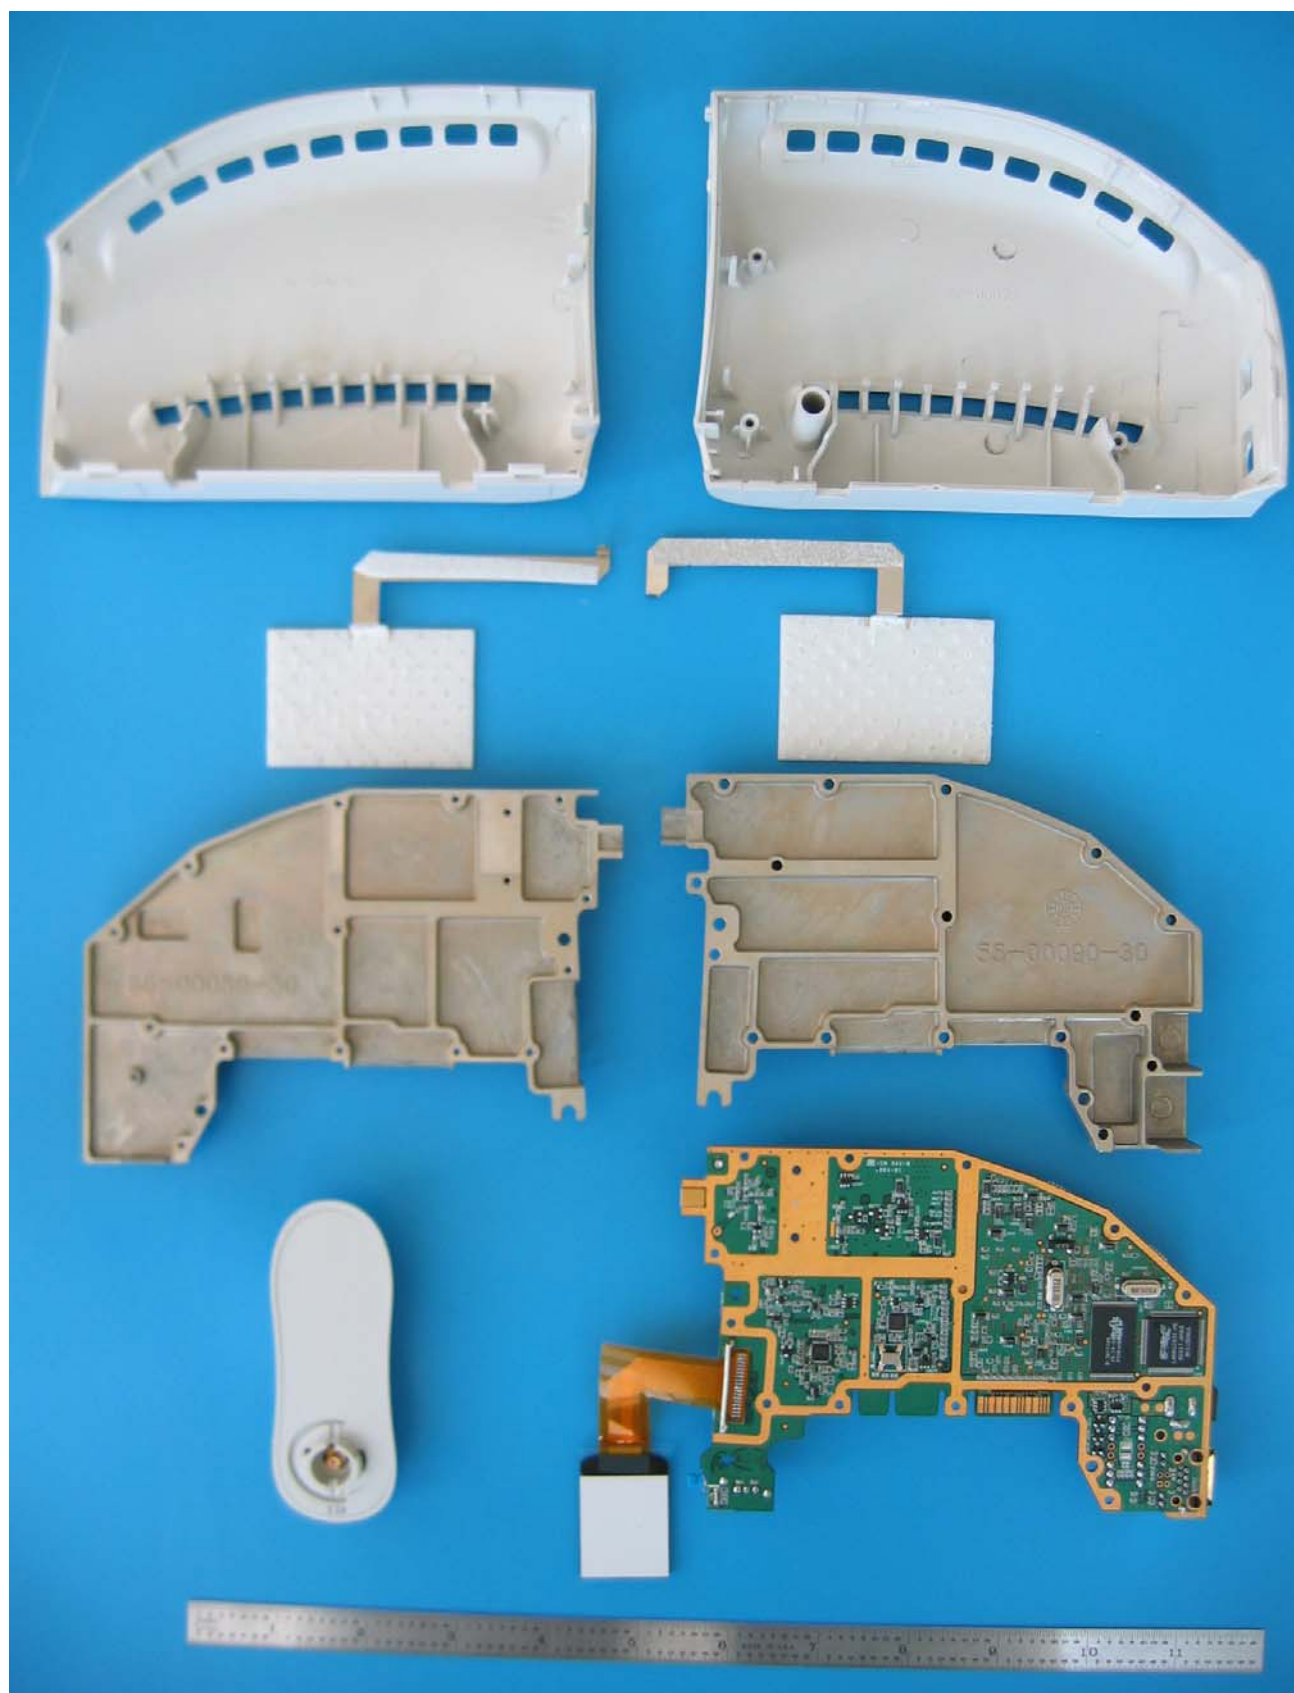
Internal board, Shield, Patch & Upright Antenna, & Casing Back View
